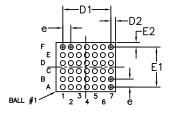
42-Bump CYW20710A1KUBXG Mechanical Drawing
